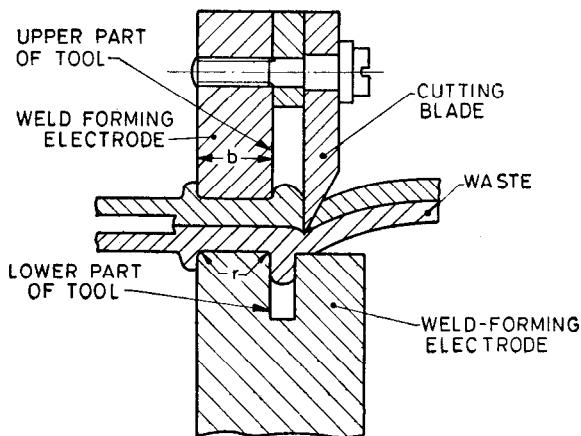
SYMMETRICAL HF WELDING TOOL WITH CUTTING BLADE
